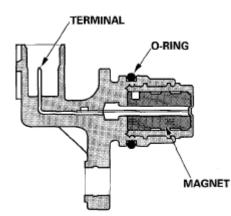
Sectional View Of Camshaft Position (CMP) Sensor A Courtesy of AMERICAN HONDA MOTOR CO., INC.
